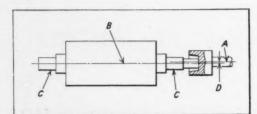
The Centre Line A of the Work-driving Collet may be Offset from the Axis B of the Work-piece as Determined by its Bearings C Because of a Bent Shaft, Eccentric Surfaces, Manufacturing Tolerances, or Collet Wear
